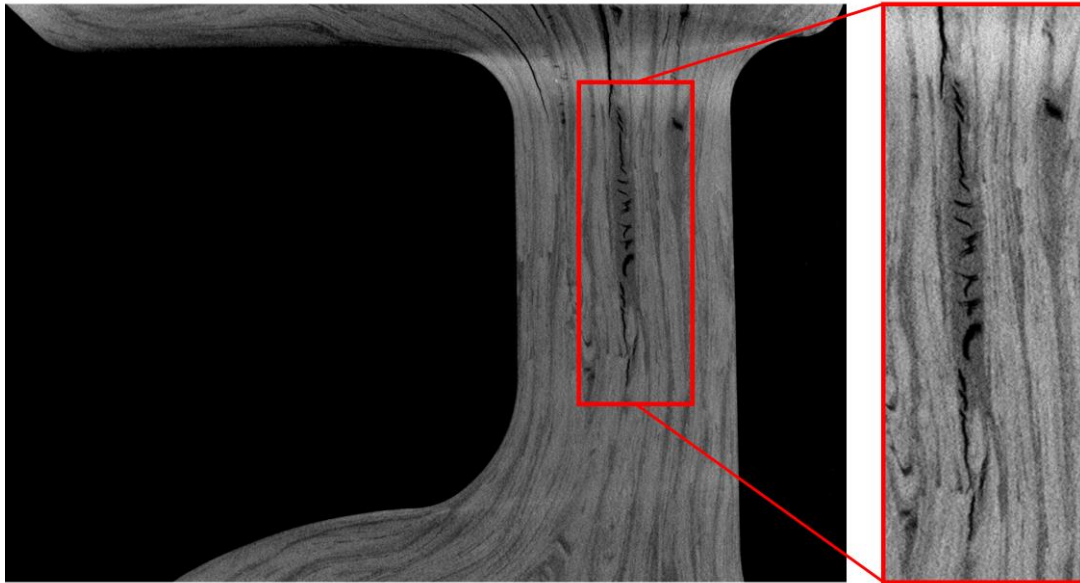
Slice of a CP-D' part, showing a crack in a resin pocket.
